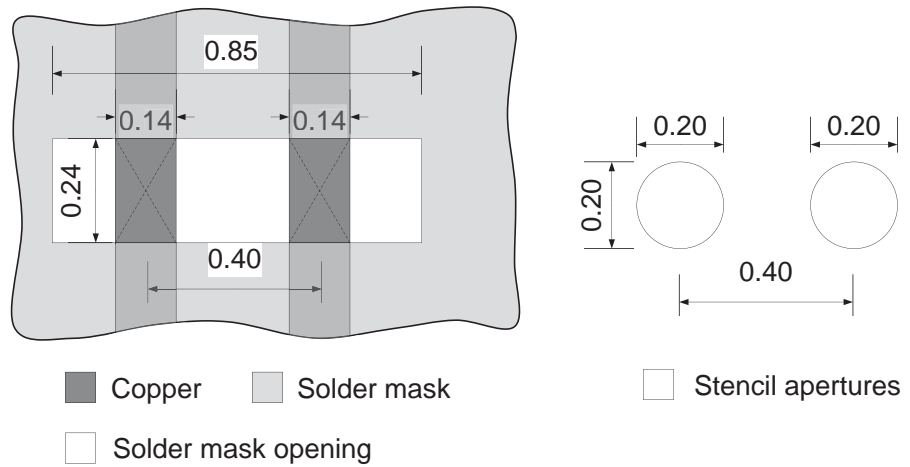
Recommended solder pad design and solder paste deposit area for SMDP
